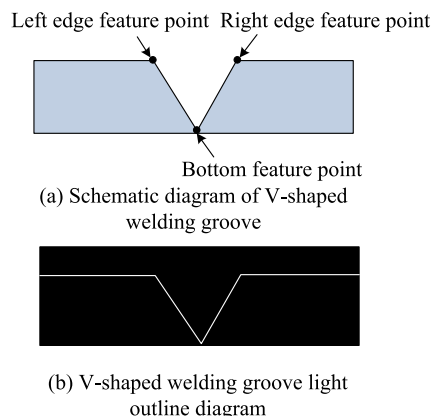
Diagram of V-shaped weld groove.
